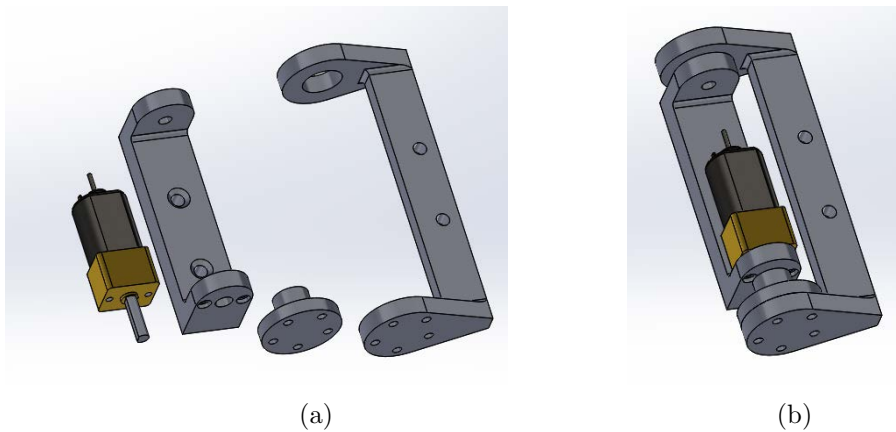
(a) exploded view of the joint with the moter in the joint. (b) Assembled view of the joint with the moter in the joint.
